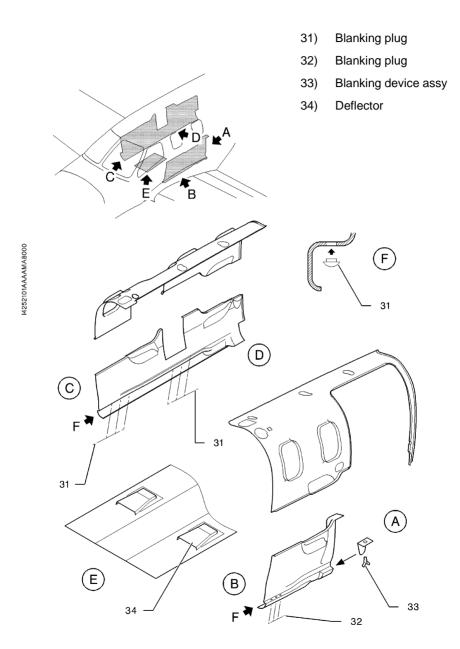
Cabin comfort - Installation of blanking plugs and deflector
